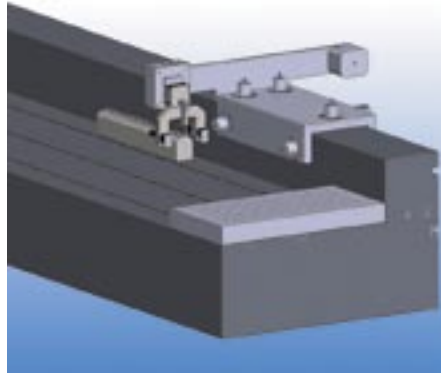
Preliminary CAD drawing of the designed step gauge interferometer.
